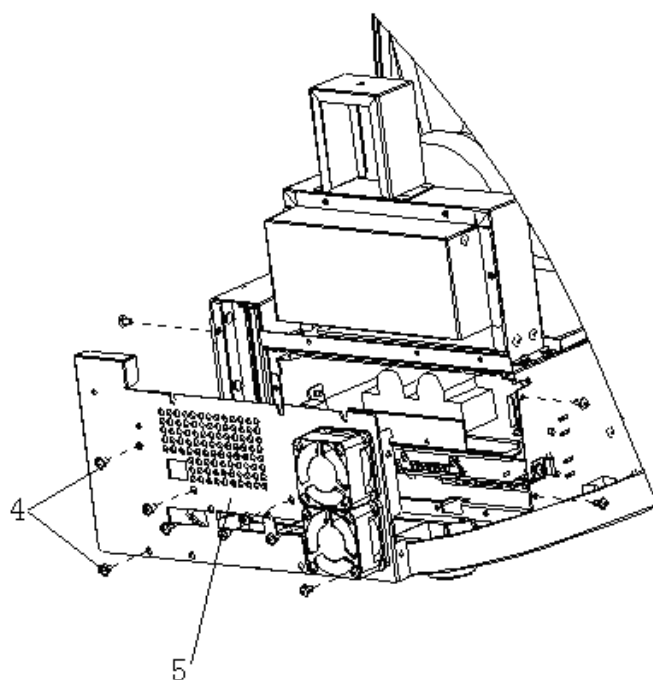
Sketch Map of Back Cover of Main Unit Box Disassembly (2)
